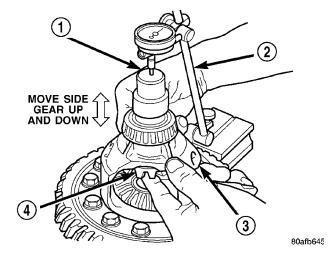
Checking Side Gear End Play (Extension Housing Side)
